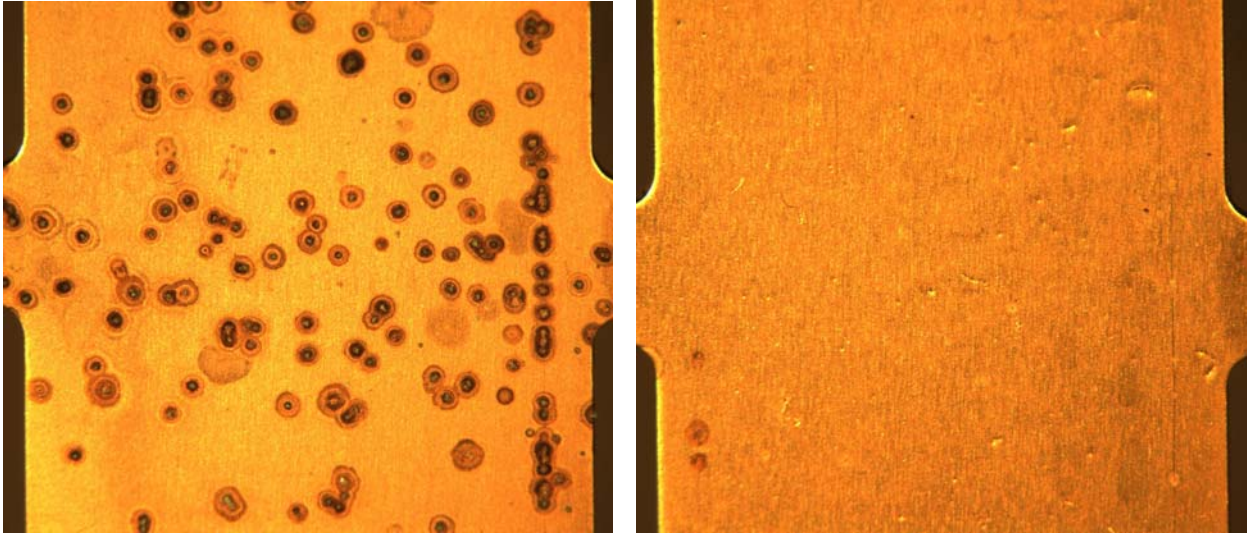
MFG porosity on unlubricated (left) and lubricated (right) gold plated coupons.
